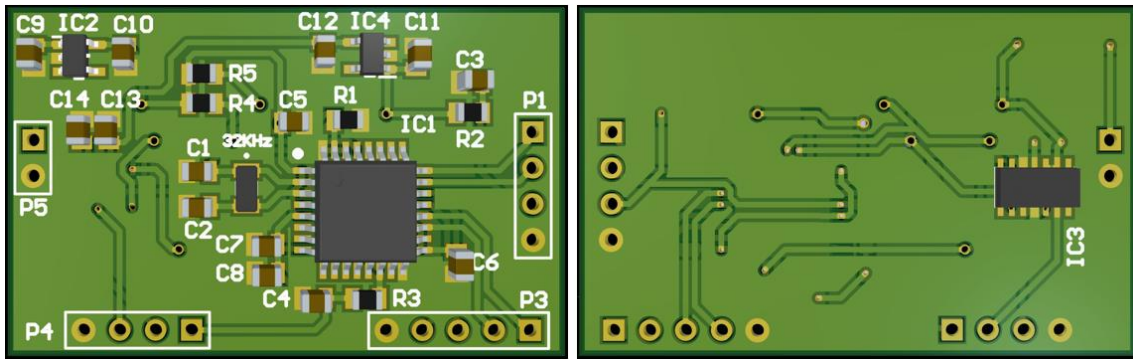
3D Rendering of Topside view (left) and Bottom side view (right) of the PCB
